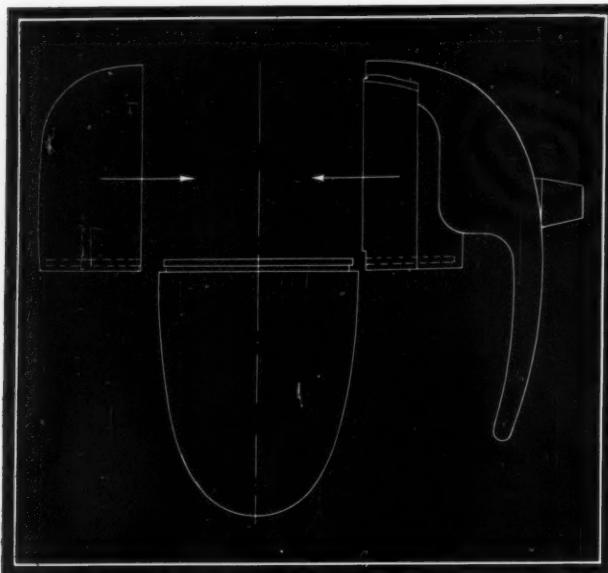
Construction of the mixer, schematically shown here, involves a minimum number of screws, using instead a bayonet groove around the motor housing and a corresponding tang on the front gear housing
